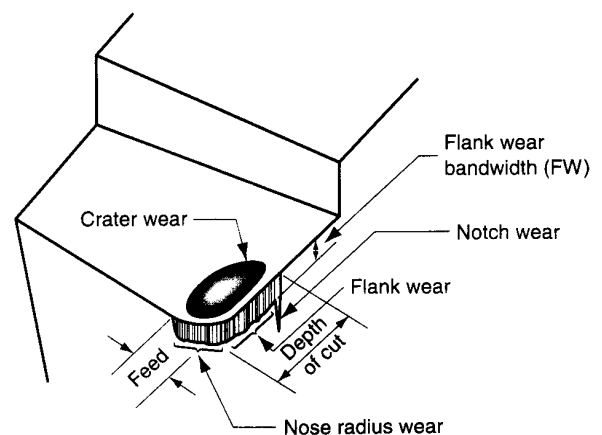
Diagram of worn cutting tool, showing the principal locations and types of wear that occur [2]
